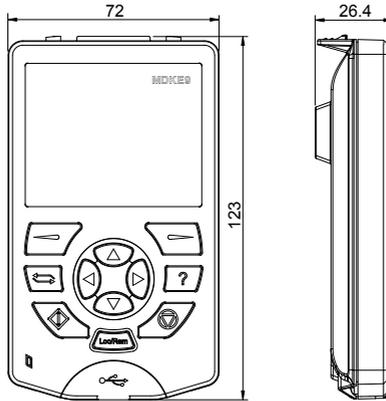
Mounting dimensions of the MDKE9 external operating panel (unit: mm)
